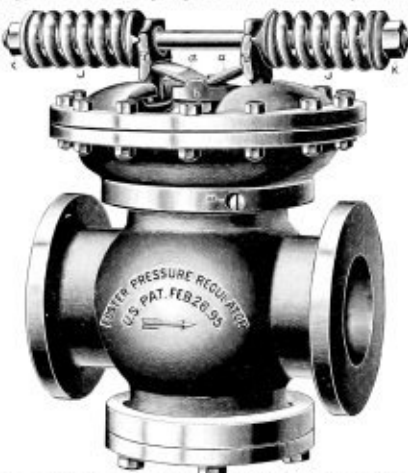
LARGE SIZE FOSTER PRESSURE REGULATOR, WITH FLANGES ENDS.
